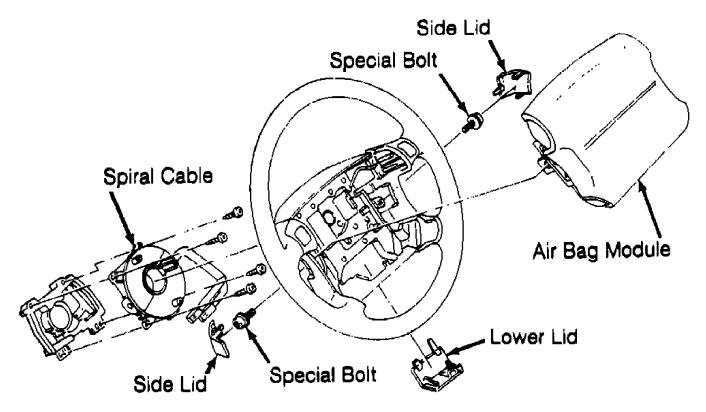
Exploded View of Steering Column & Air Bag Module Courtesy of Nissan Motor Co., U.S.A.
